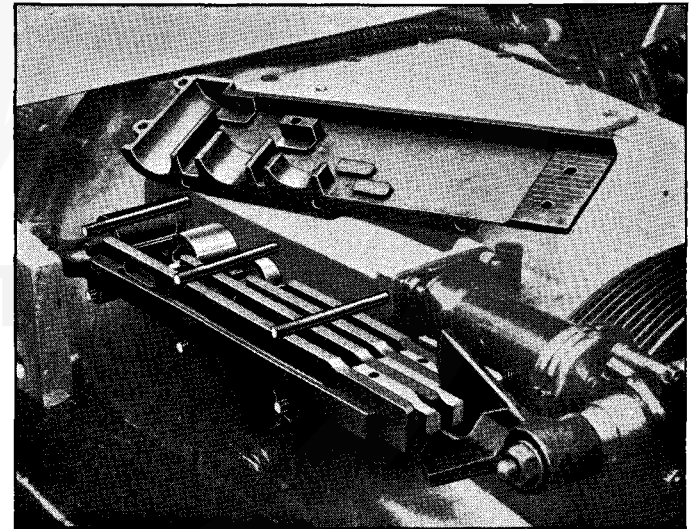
Gear Selector Cams and Gear Selector Rods and Levers.
